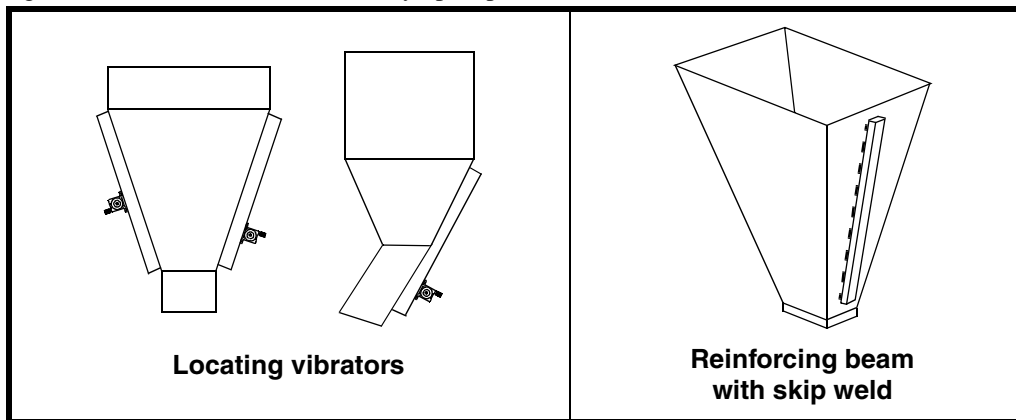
Locating Vibrators and Reinforcing Beams on Hoppers
